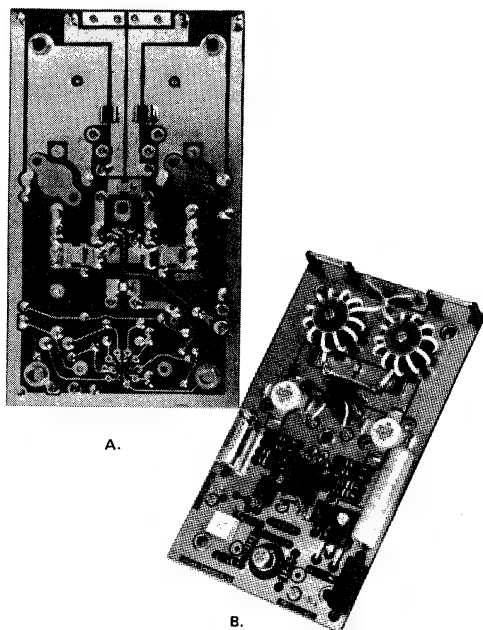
Bottom and Top of the 300 W Module Circuit Board
